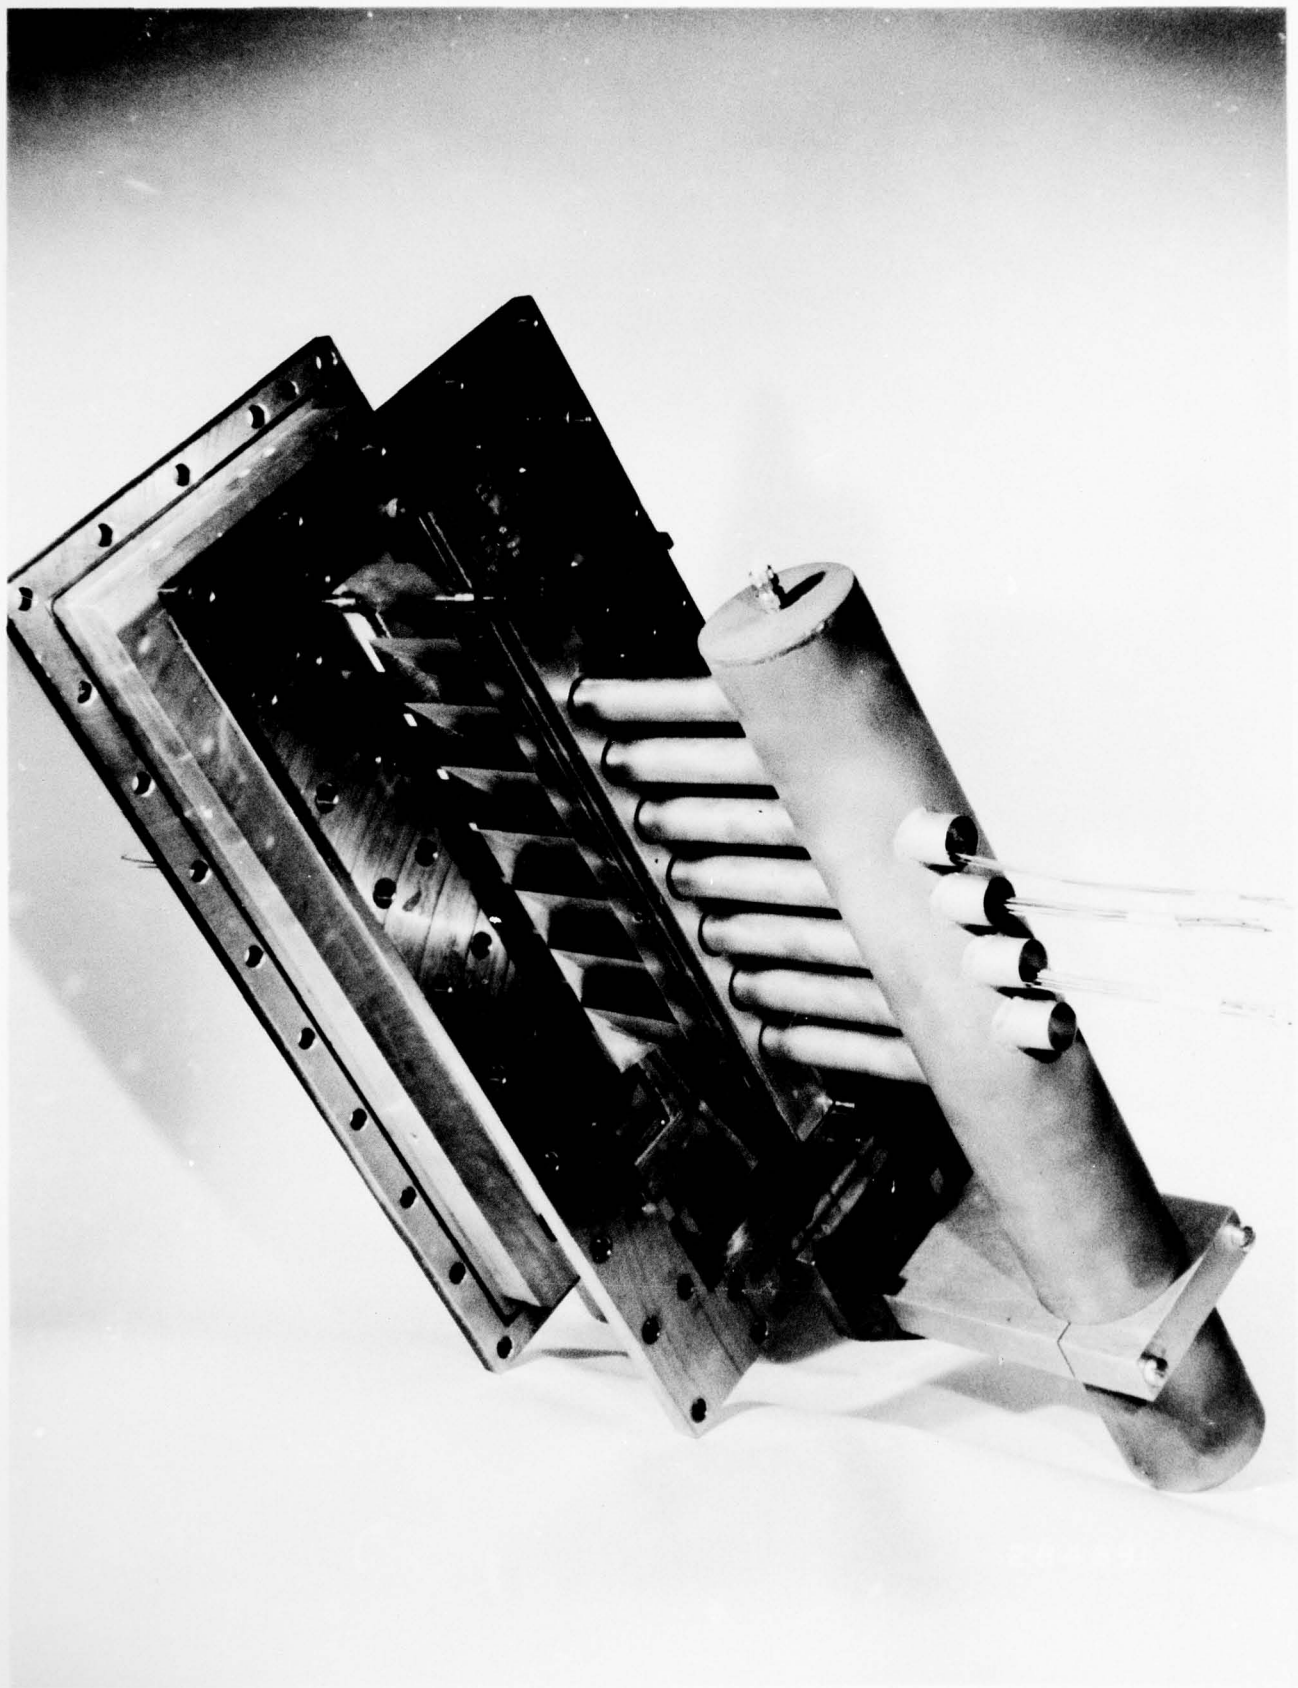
THREE-QUARTER VIEW OF CASCADE ASSEMBLY
